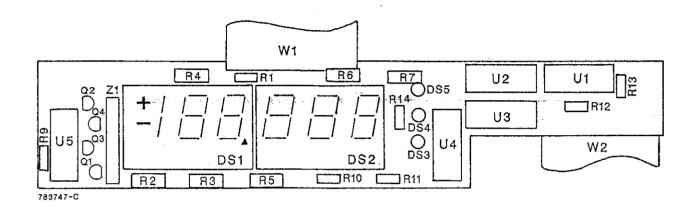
±180° Display Circuit Card Assembly A2, Parts Location Diagram
